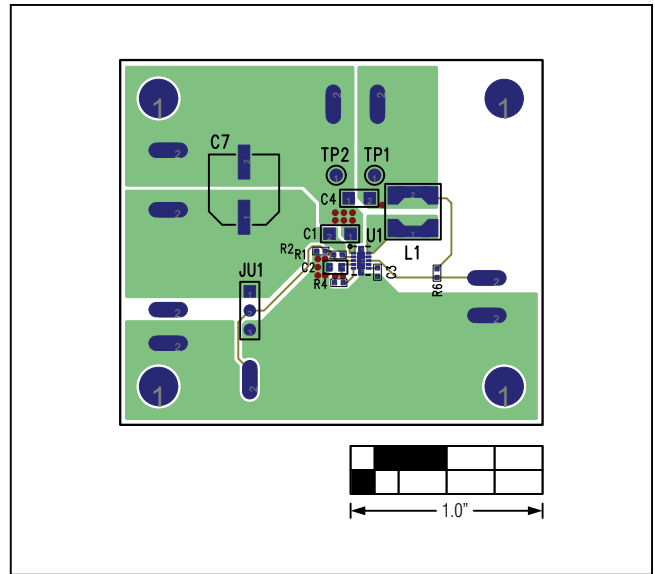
MAX17501A/MAX17501E EV Kits PCB Layout—Component Side
